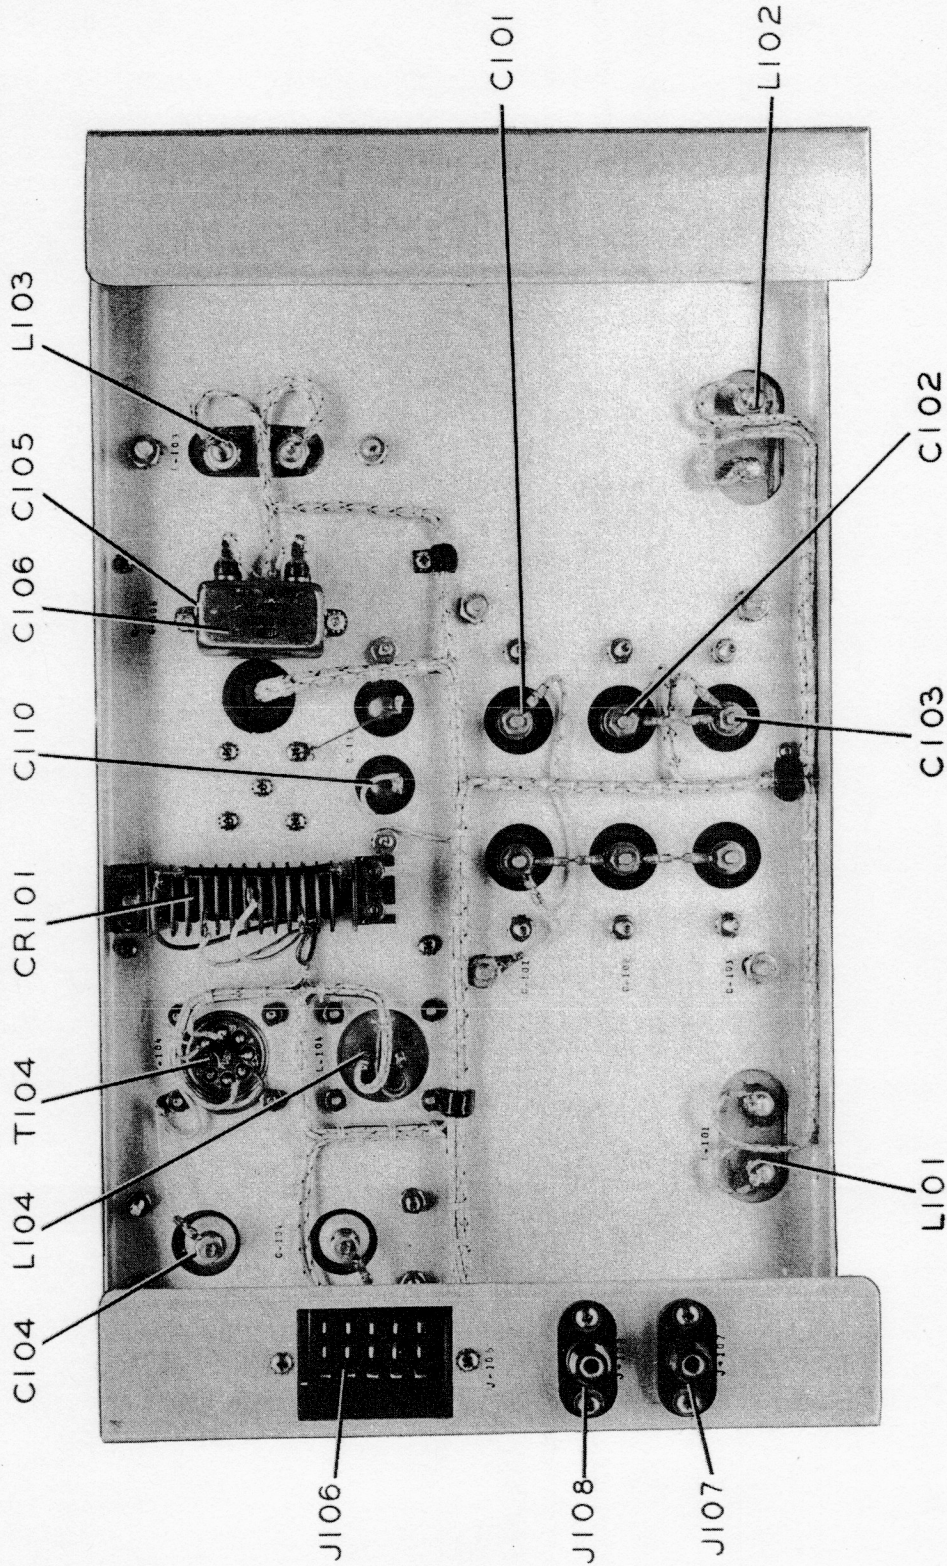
Type 242F-2 Filter and Bias Supply Unit, Rear View, Dust Cover Removed
